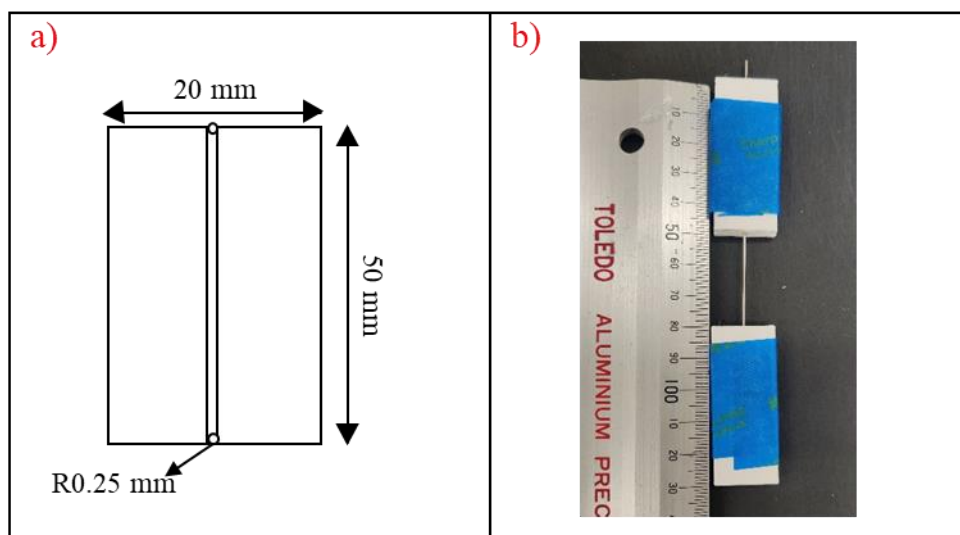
a) Dimensions of the tensile testing tab b) Mounting of composite filament using 3D printed tabs.
